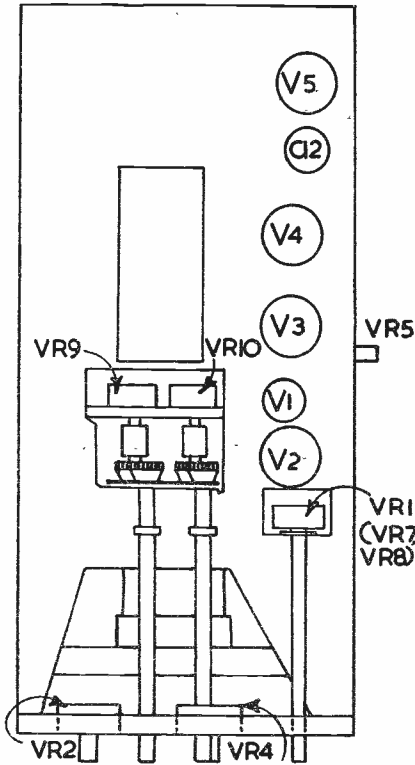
Below-chassis layout showing the geared drive assembly for fitting VR9 and VR10. Also to be seen is the component mounting panel and the housing of VR1.
